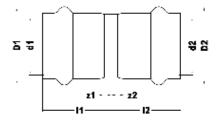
Dimensions (Example DN25) d1 = 28 mm; D1 = 37 mm l1, l2 = 30 mm; z1, z2 = 6 mm
